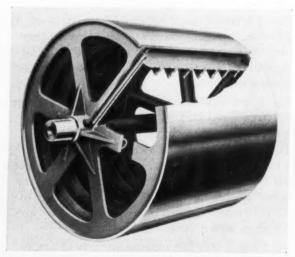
Drying drums of welded steel resist internal pressure without being unduly heavy
